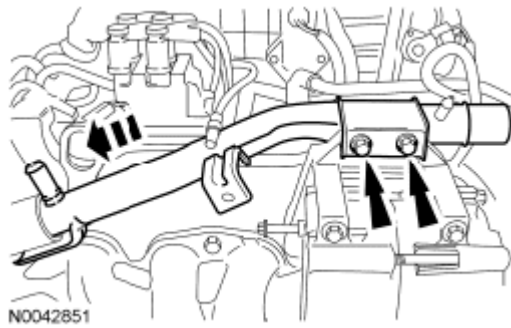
Locating Front Coolant Outlet Pipe Bolts
